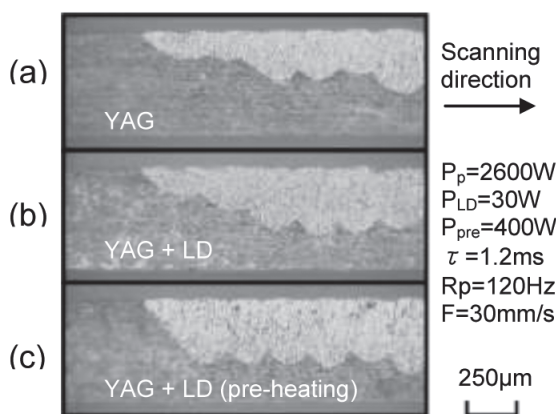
Cross section of weld bead at beginning of laser irradiation
